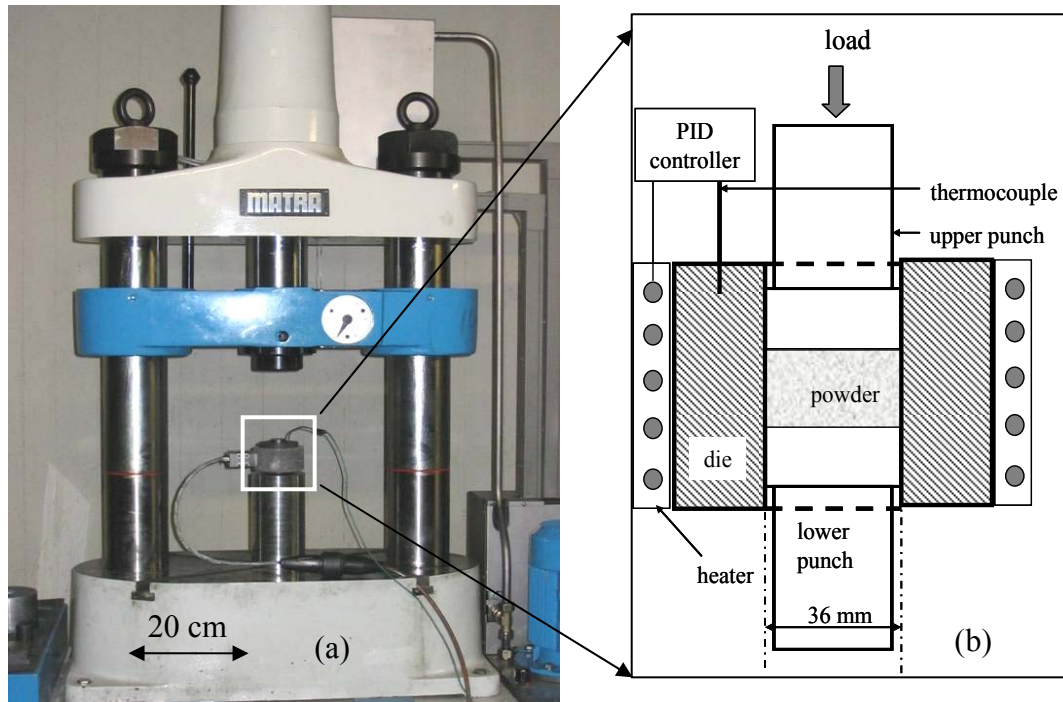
(a) 1000 kN uni-axial pressing device with die and heating system marked by white rectangle. (b) A detailed sketch of the die and punch showing the thermocouple, heating device and powder.
